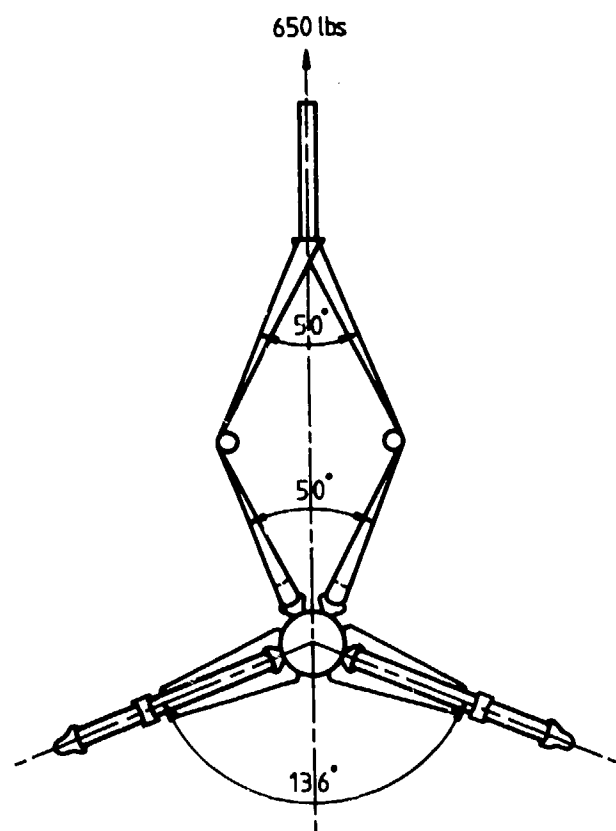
PARTIAL DISENGAGEMENT OF THE LATCH WHEN THE TONGUES PRIZE THE BUCKLE APART. SCALE DRAWING WITH SLOTS ENLARGED TO 6.4 mm.
